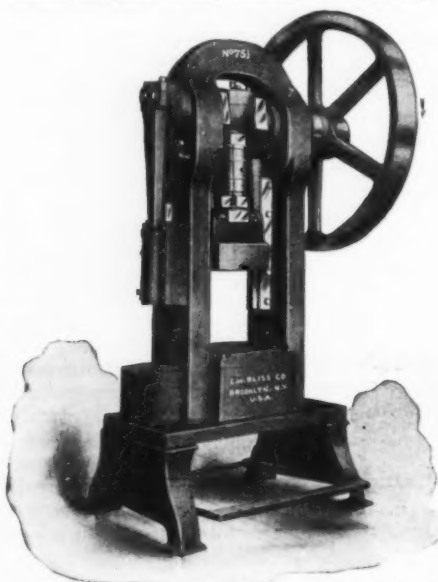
STRAIGHT-SIDED TRIMMING PRESS.
